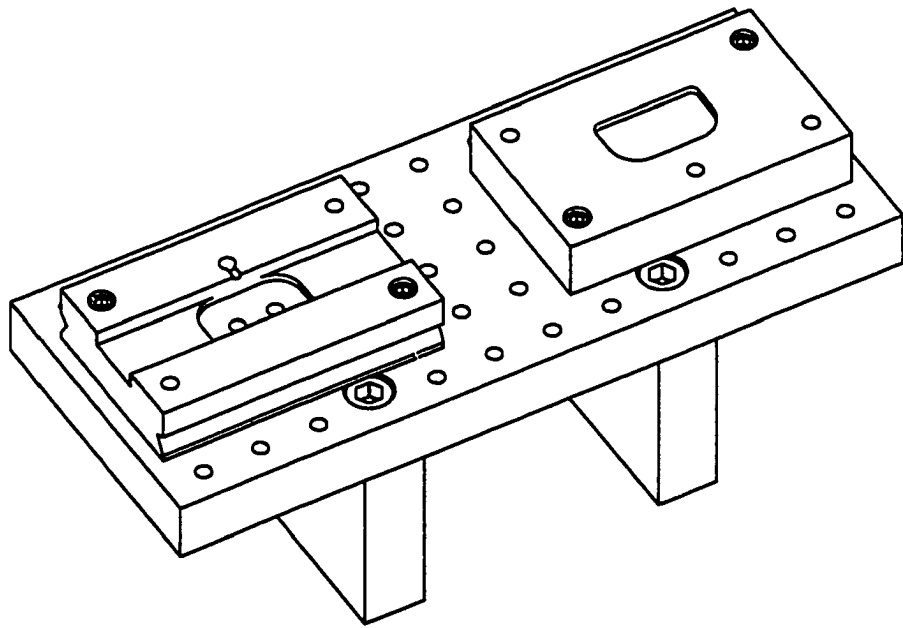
The flexible fixturing system proposed for SRP mold machining.
